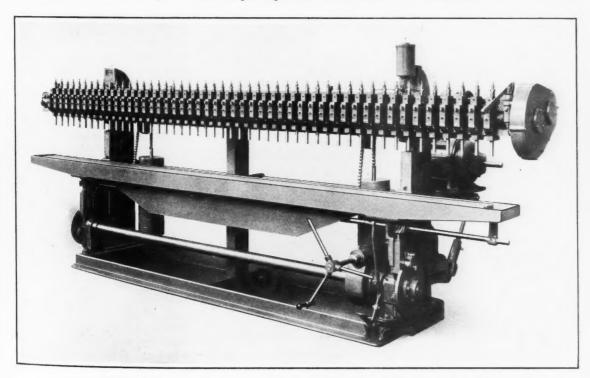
Moline Steel-constructed Drilling Machine with Forty-nine Spindles
